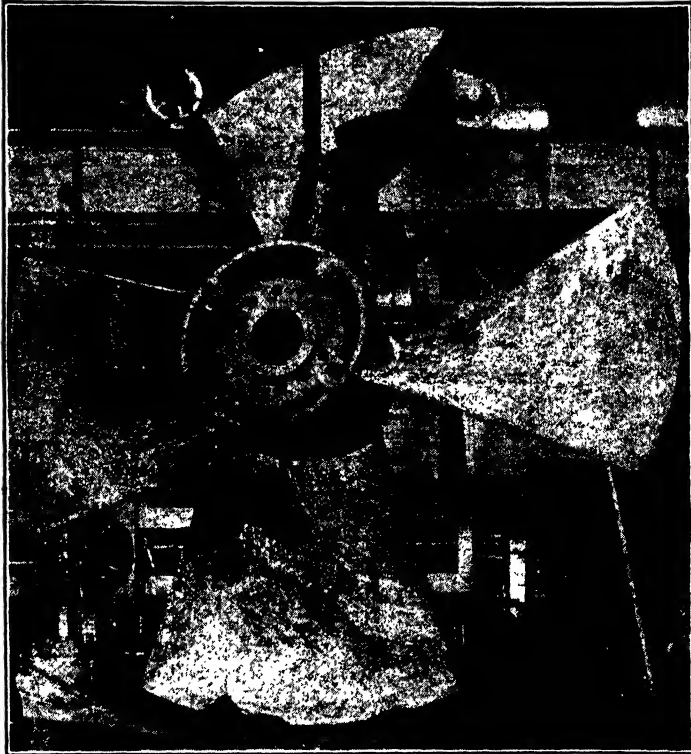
A 156-in. diameter, 2,000-hp., four-blade, cast-steel, Nagler high-speed runners. Weight 17,000 lb. each, head 13 ft., speed 80 r.p.m. (*Allis-Chalmers Manufacturing Company.*)
